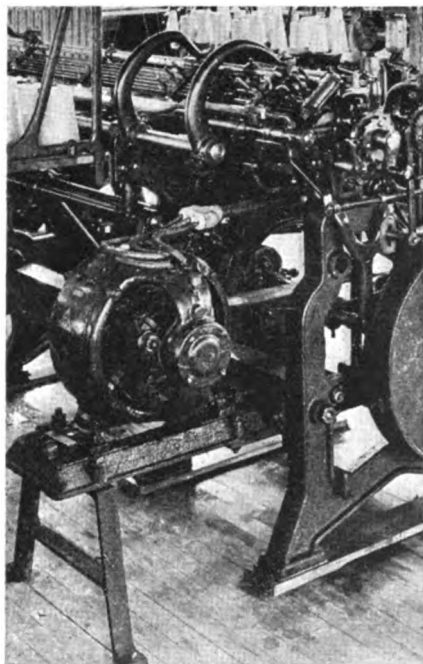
Over 250 of this type of bracket arrangement for mounting motors are used at one factory.
